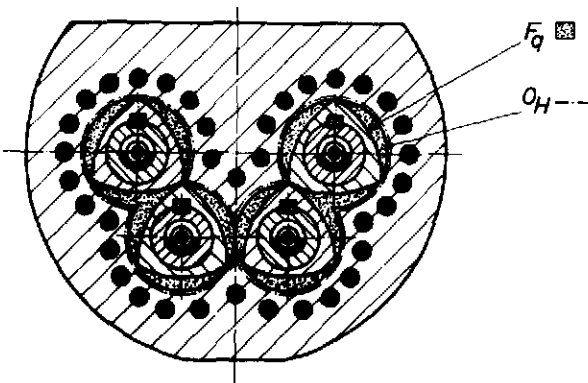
Design principle (schematic) of the four-shaft evaporator-type helical screw
